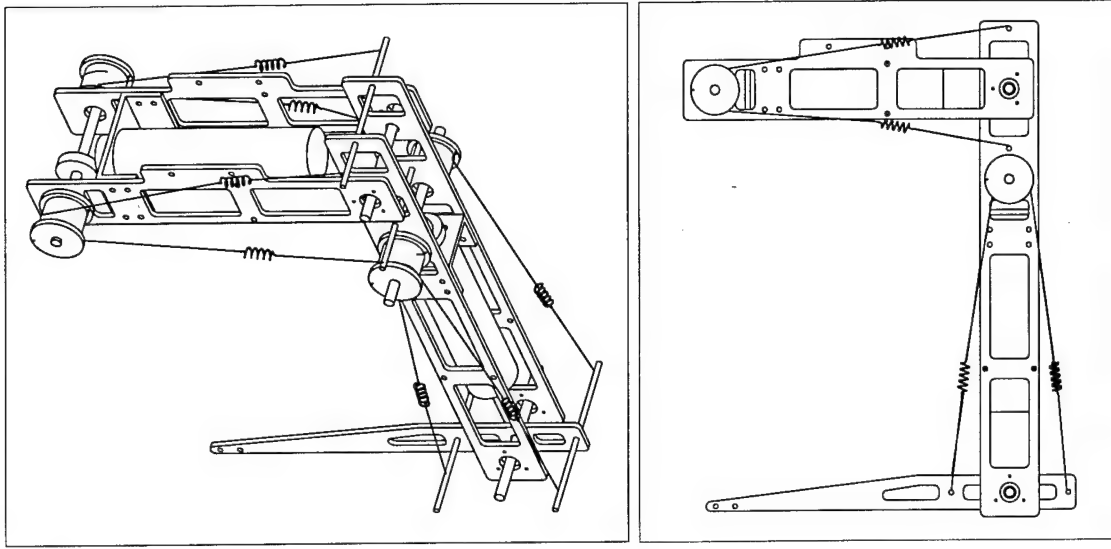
CAD Drawings of the Quadruped Leg. *Left: Isometric view. Right: Side View.
